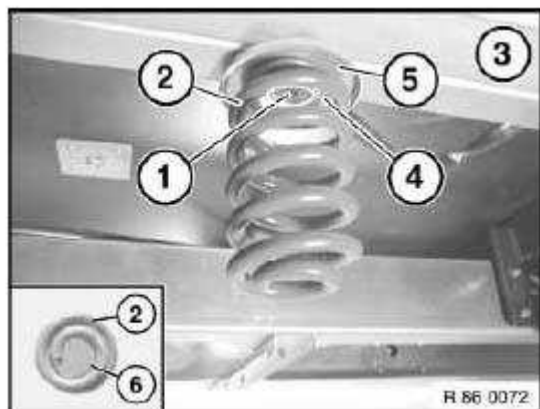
Identifying Screw Between Coil Spring & Longitudinal Member
